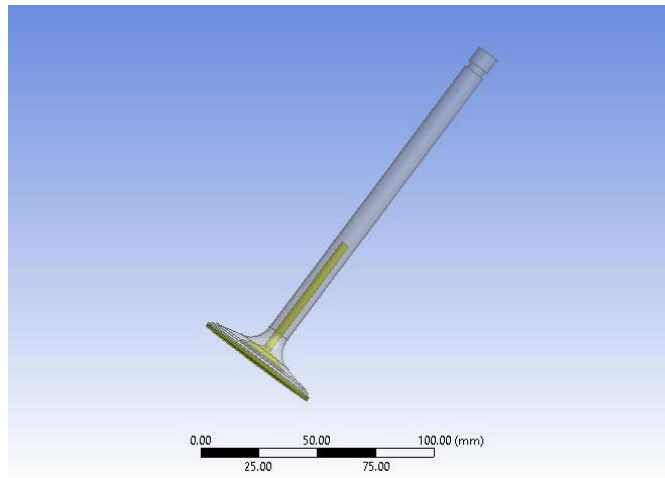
Valve filled with sodium inside and coated with TiCN on head face of 1mm thickness
